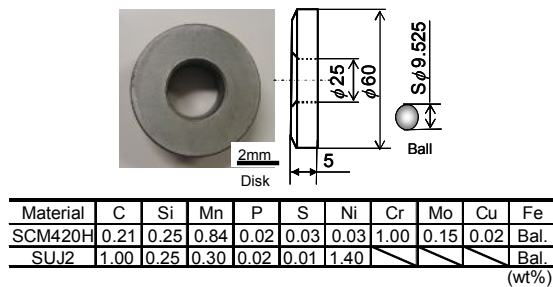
Shapes, dimensions and chemical compositions of test specimens
